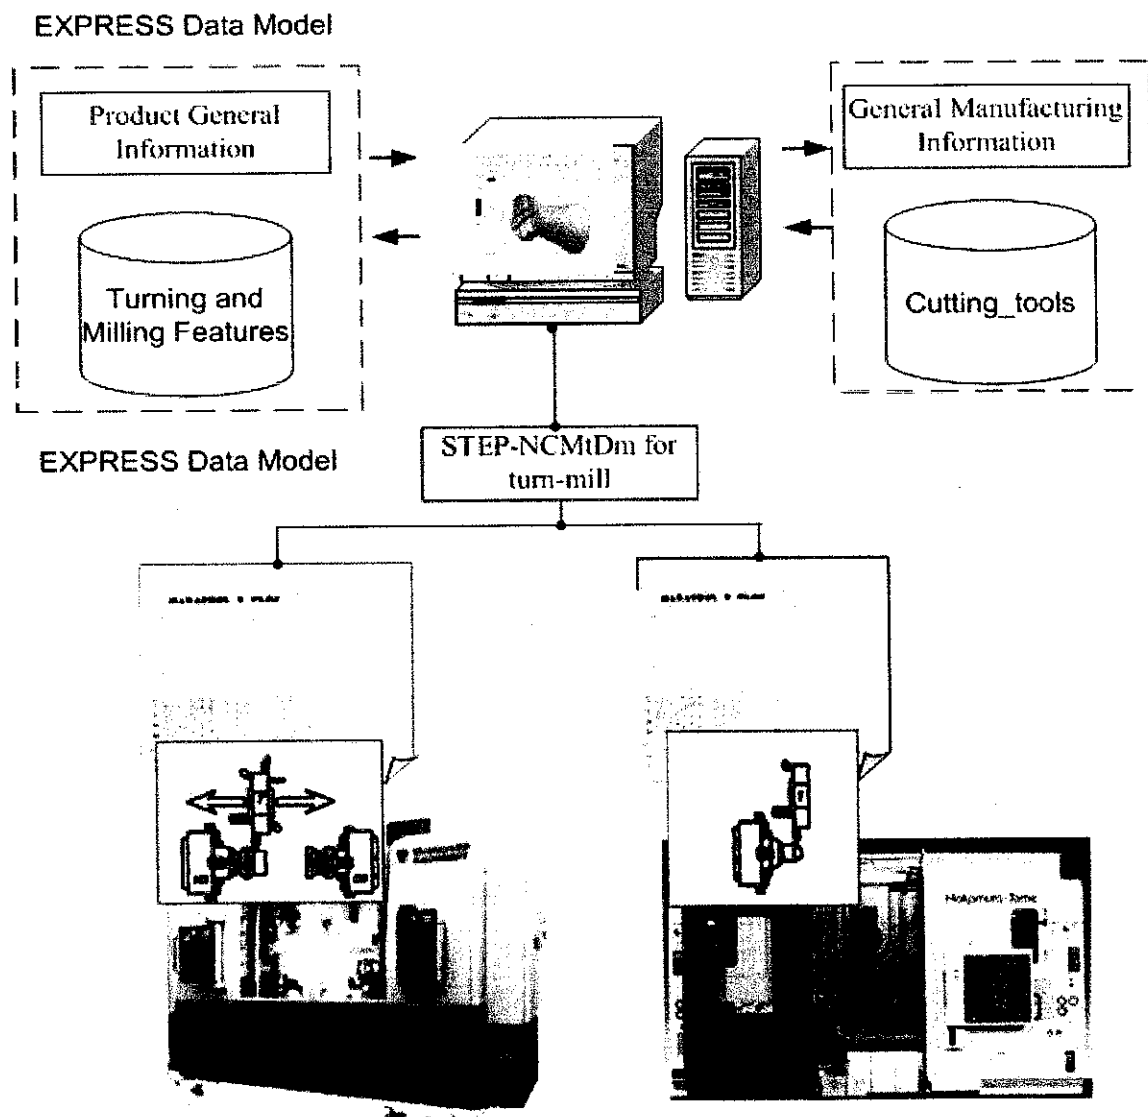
Inter operable manufacturing for single spindle B-axis and dual spindle turn- mill operations
